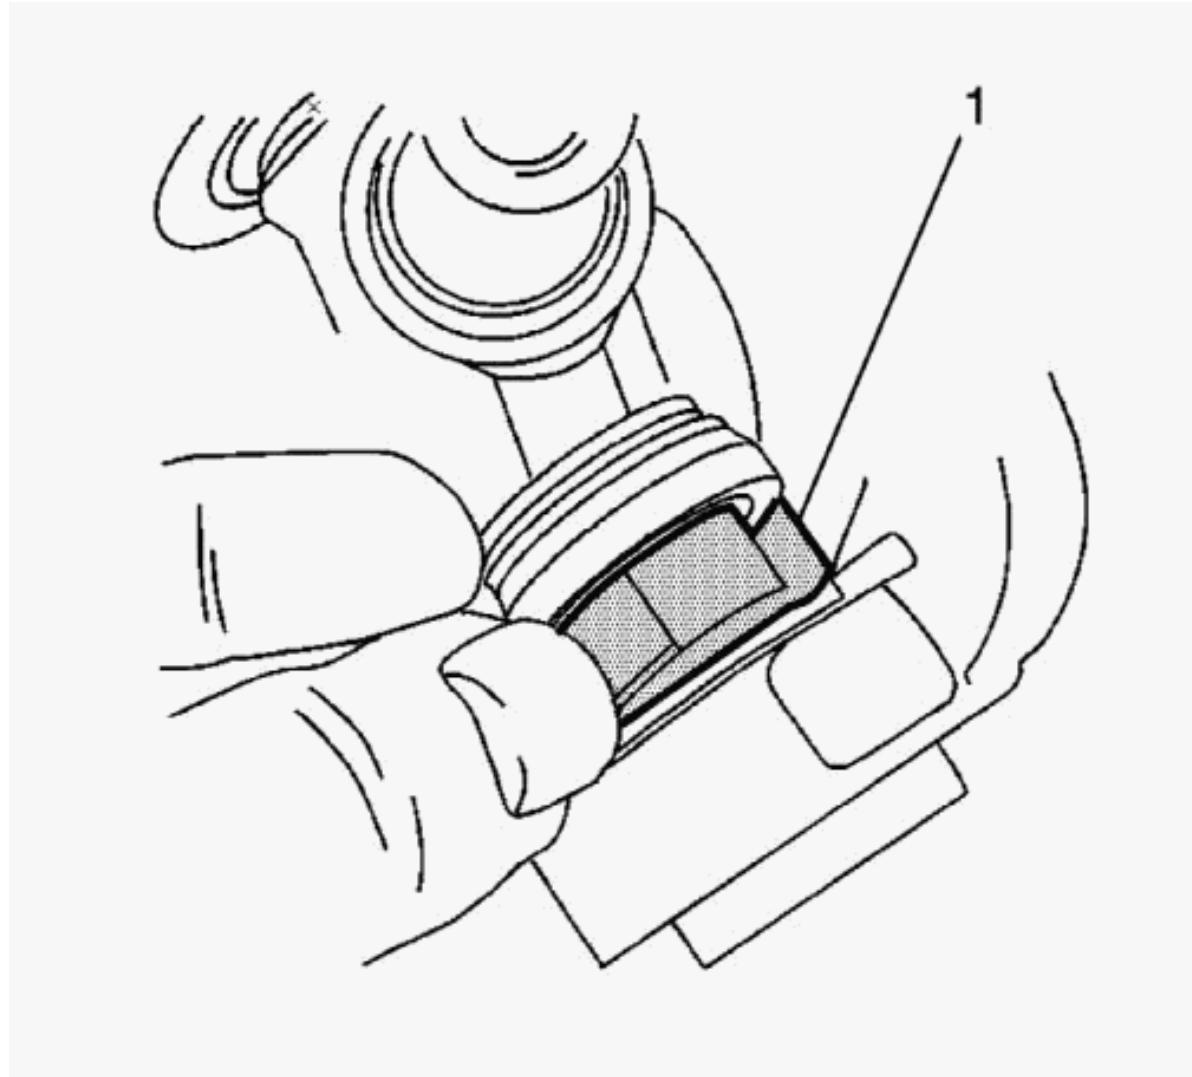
Placing U-Joint Bearing Spacer Remover Between Seal And Bearing Cup
